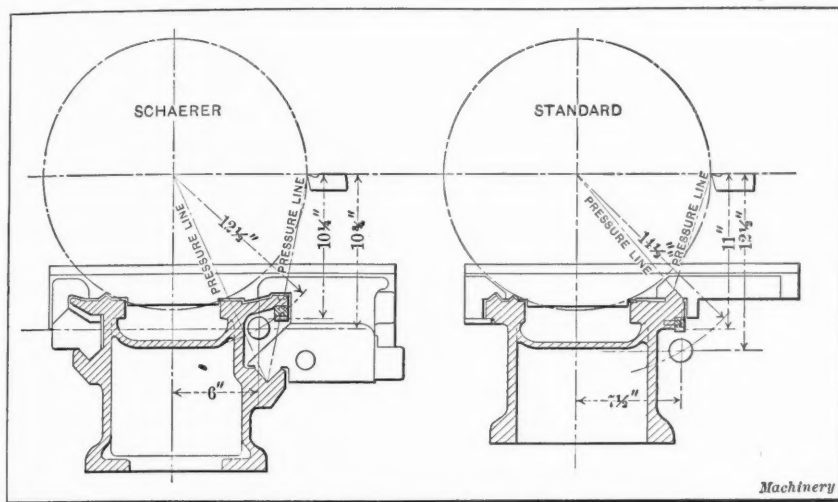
Cross-section Views of Standard and Schaerer Lathe Beds
